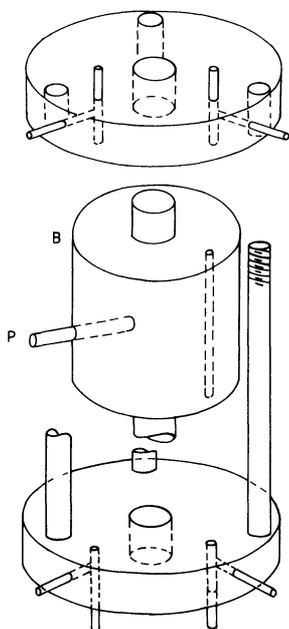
Exploded view of rotary valve. Where B = barrel and P = pin.
